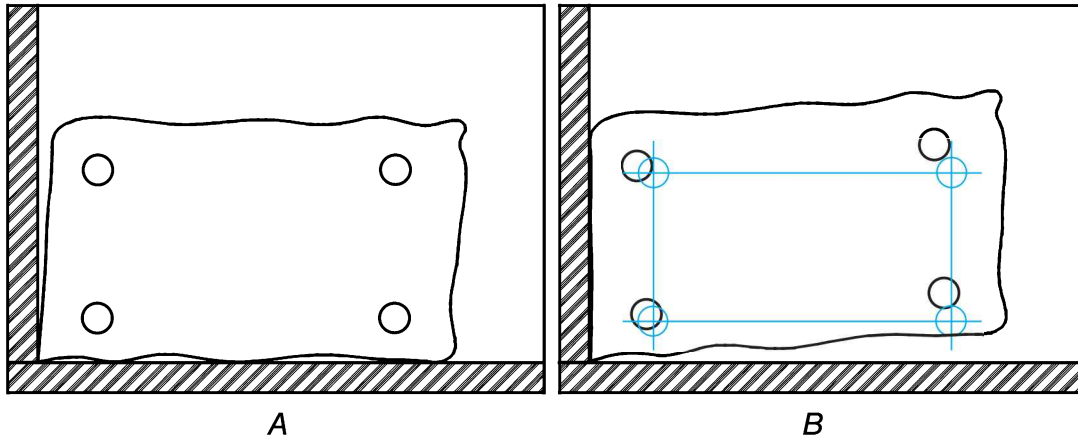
Possible datum feature interpretations of the drawing in Fig. 1-5.
